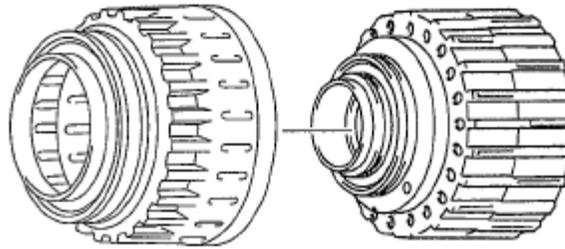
Identifying O-Rings On C3 Clutch Piston Component
